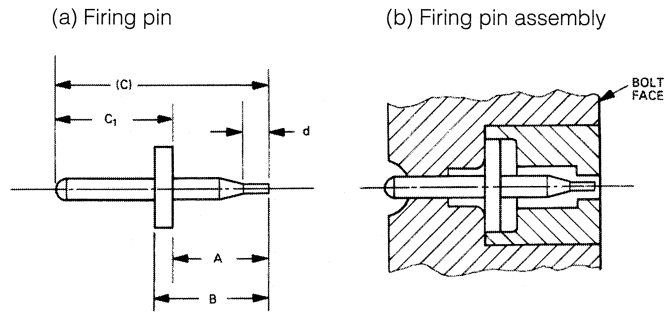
Functional Dimensioning: Firing Pin Assembly
